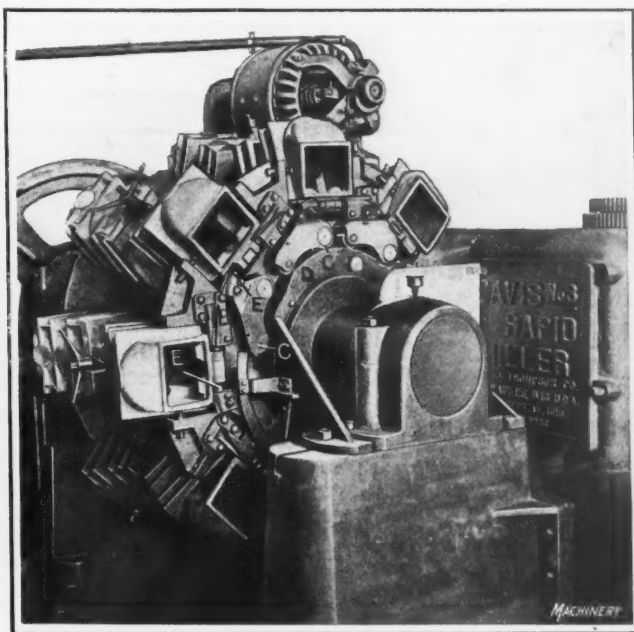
Close-up View of the Work, showing Hand-operated Auxiliary Clamps which hold Each Casting at the Center
